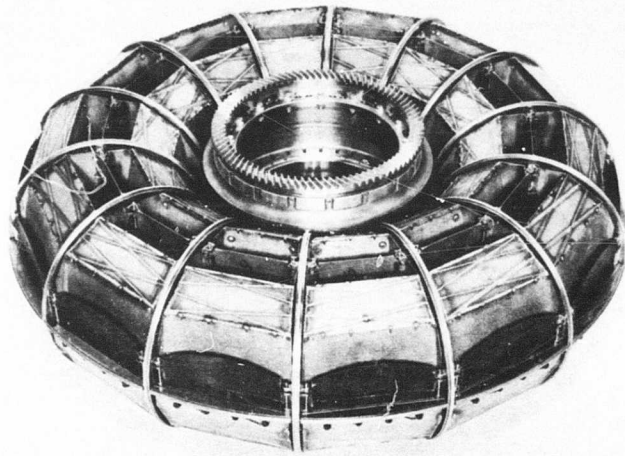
Side View of the Cold Side of the Rotor Assembly.
